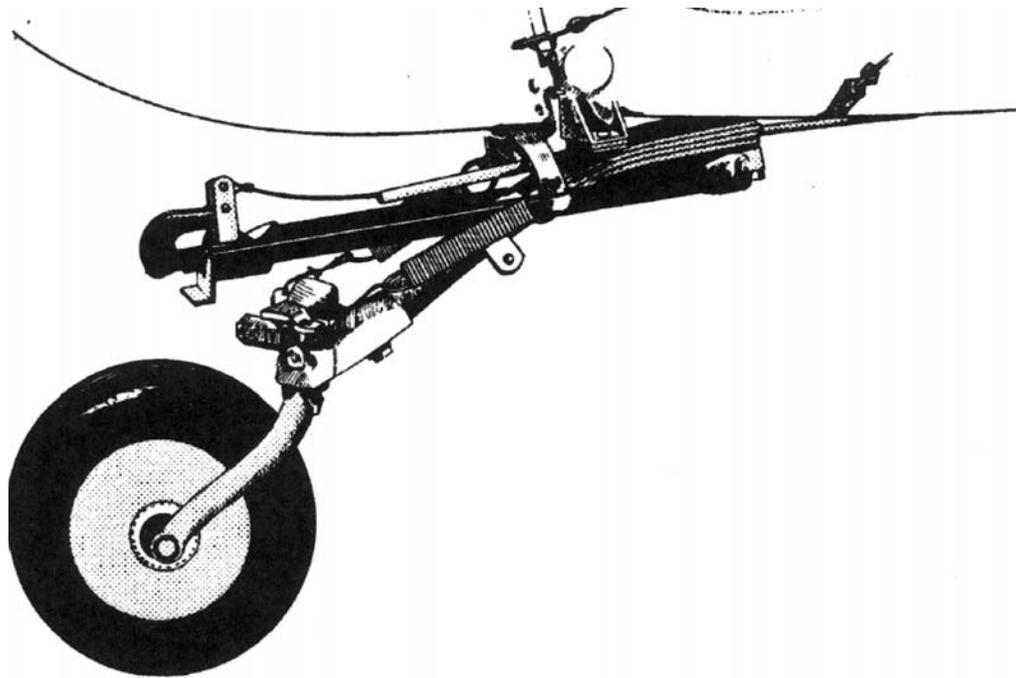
CONVENTIONAL GEAR AIRCRAFT-SHOCK STRUT TYPE TAILWHEEL
